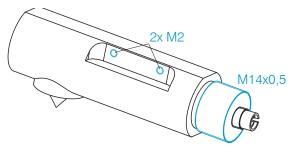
Mounting for series IFS2407/90-0,3 sensors
